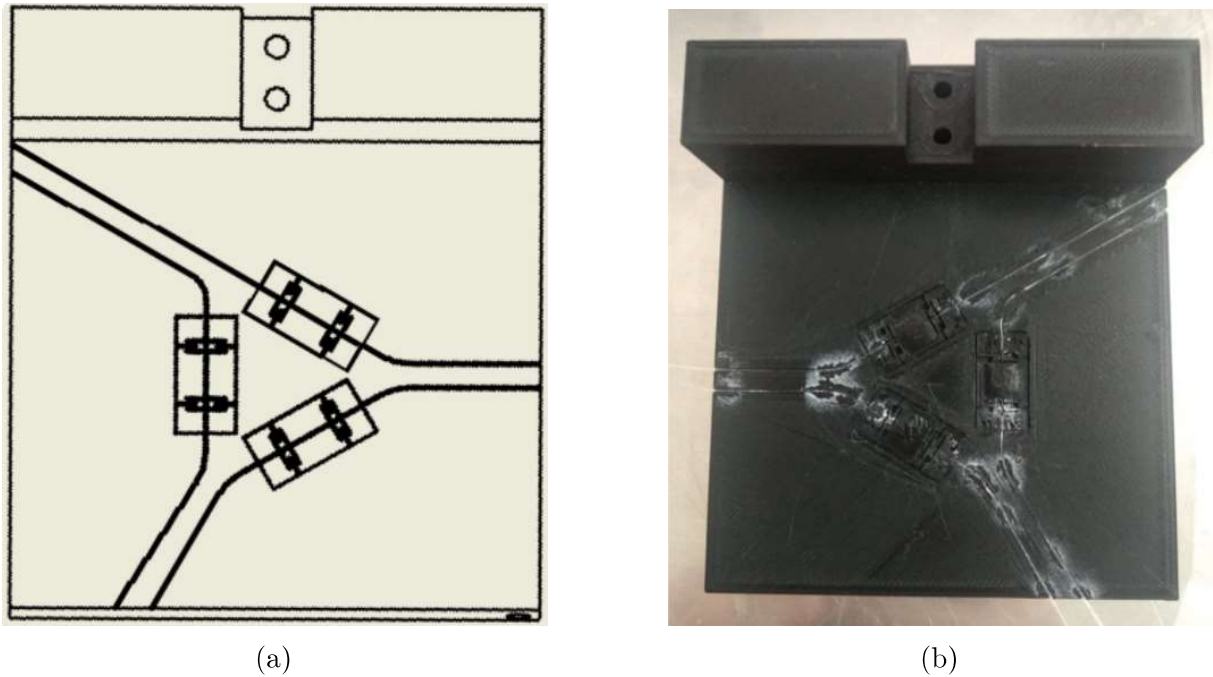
Second claw (a) 3D design and (b) manufactured prototype.
